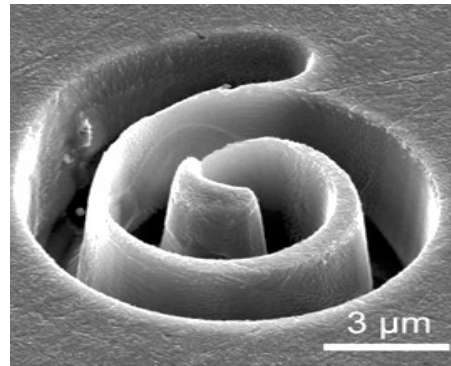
5 µm deep spiral machined in Ni sheet [35]
